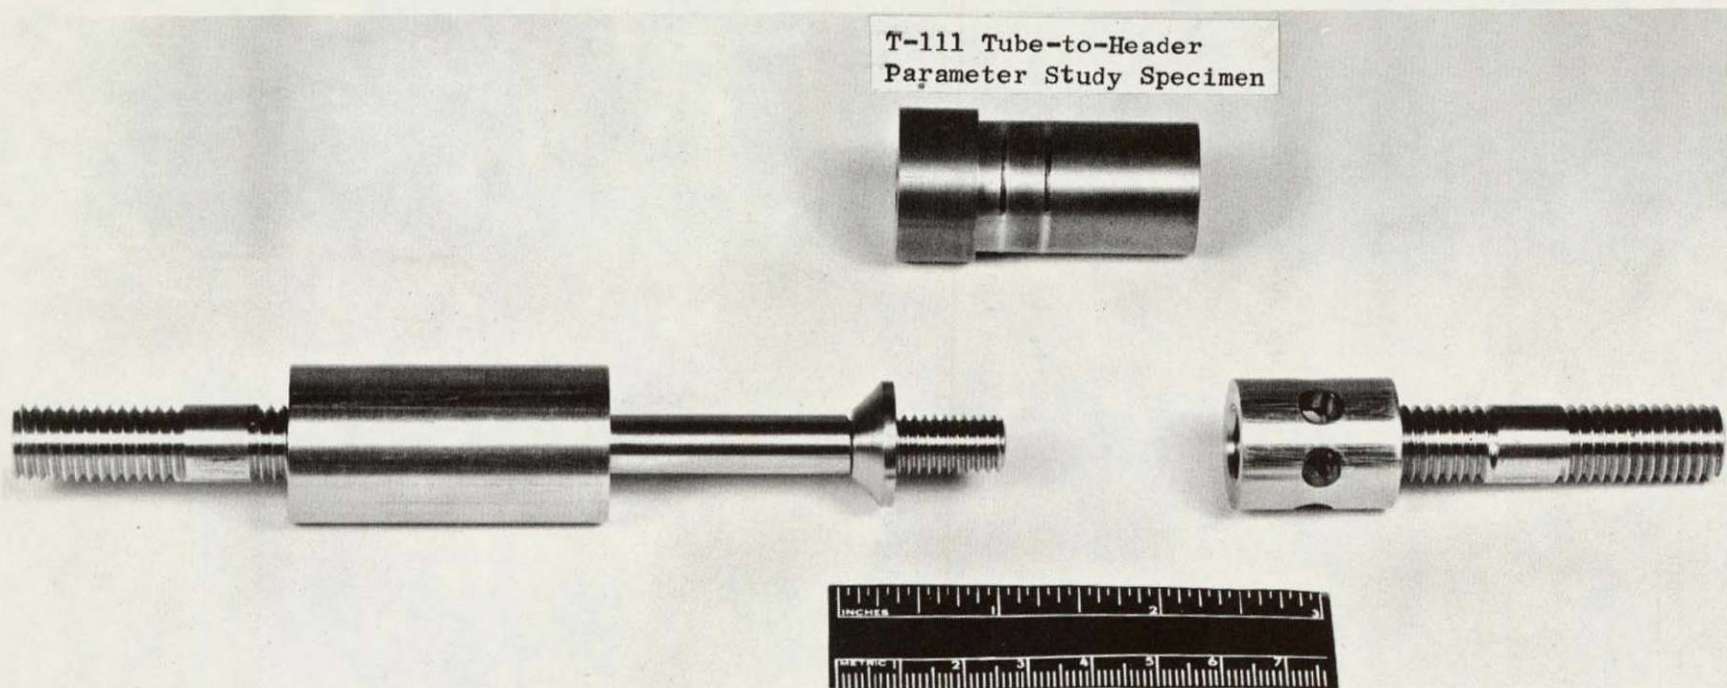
Stainless Steel Adaptors for Mechanical Testing of GTA Tube-to-Header Weld Specimens.
